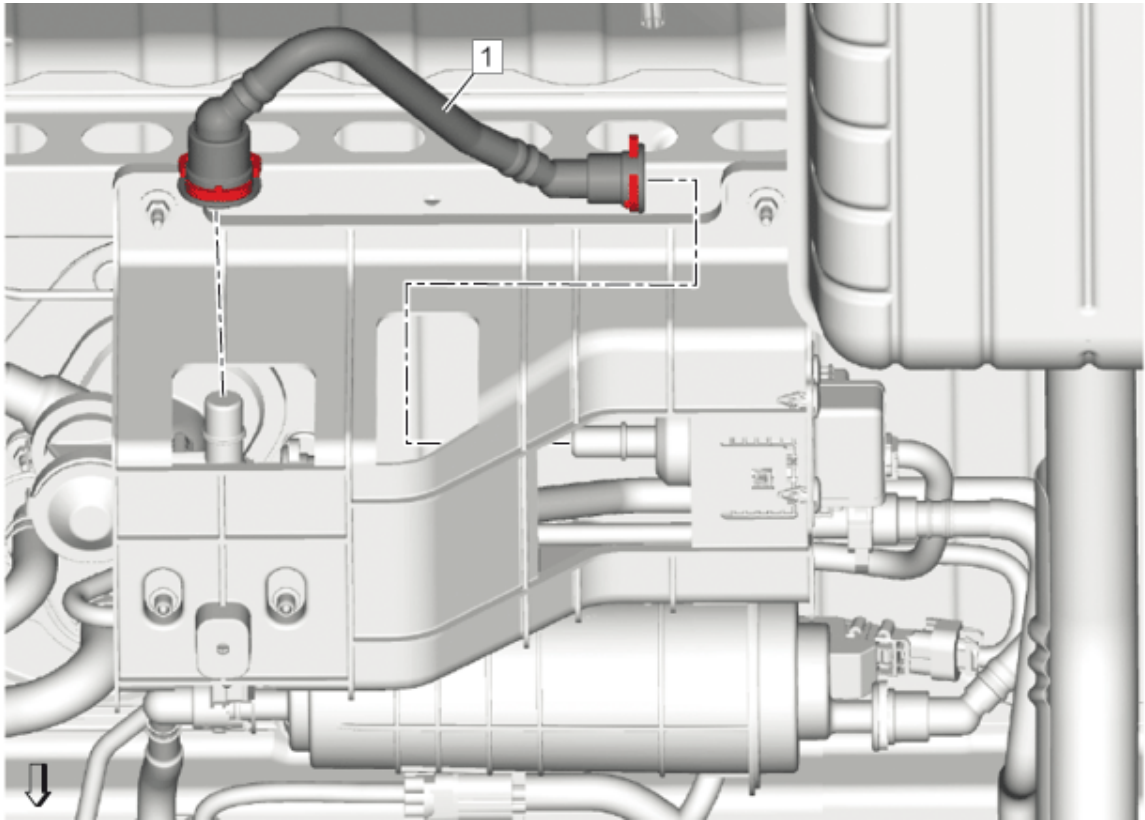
Evaporative Emission Canister Control Valve Vacuum Hose
